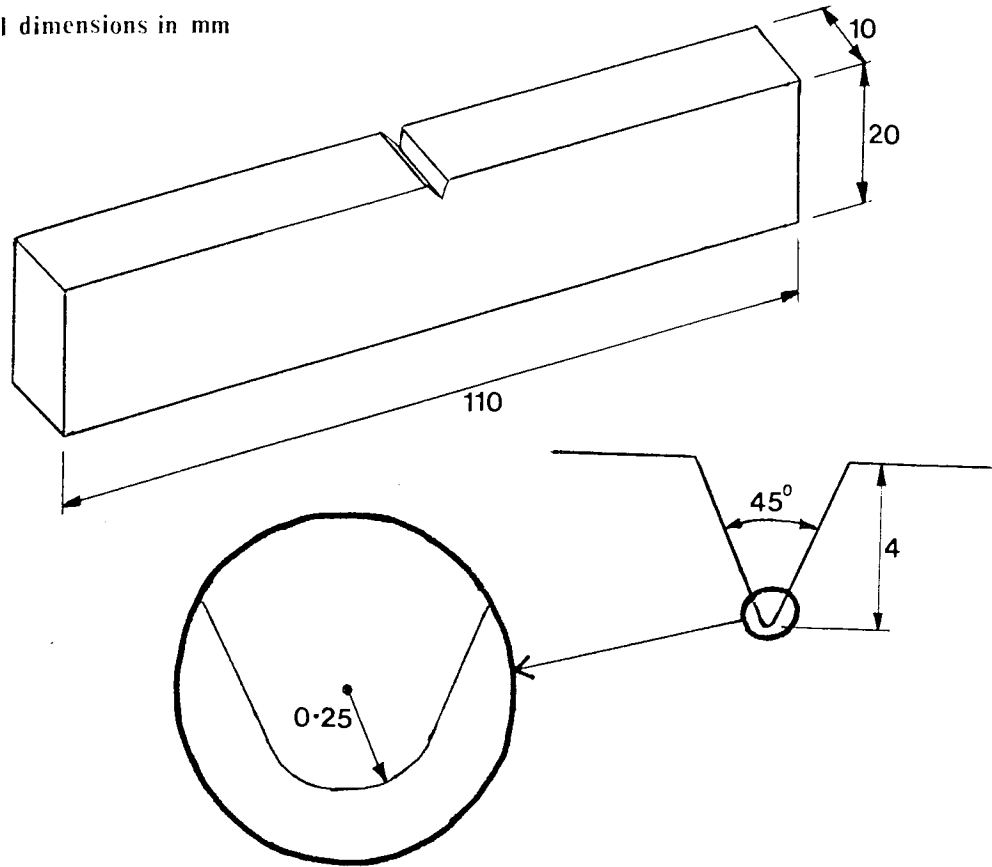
CZ20-T6 and 2014-T6 sharp notched specimen dimensions.
